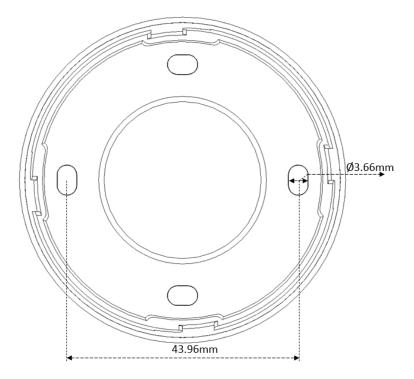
Modbus CO2 Sensor Mounting Holes – Flush Mount
